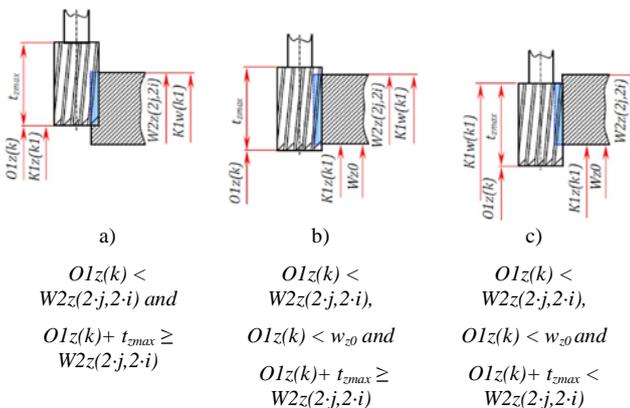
Coordinates of upper contact points $K1w$ for different tool positions relative to workpiece in z direction
